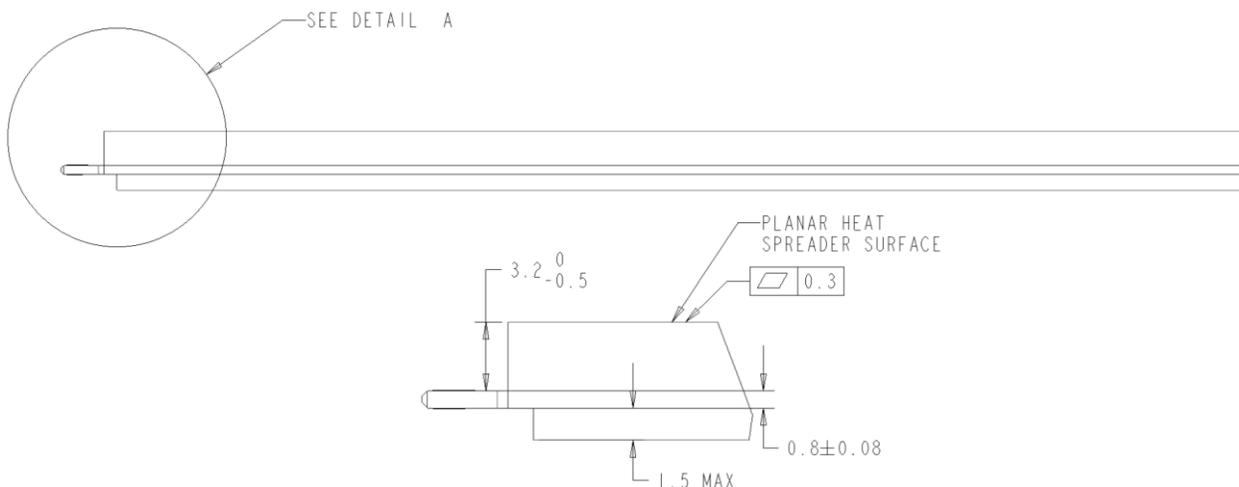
H4.2-D8-P Stack-up Top Mount Double-sided Add-in Card for 3.2mm +0 / -0.5 Top-side dimension and 1.5 Maximum Bottom-side Component Height
